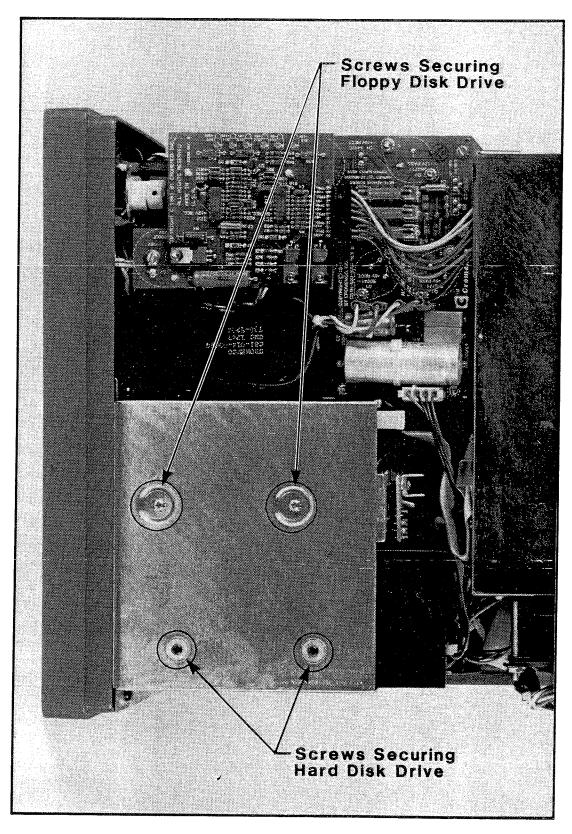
SCREWS SECURING CS-1H DISK DRIVES (top view)
